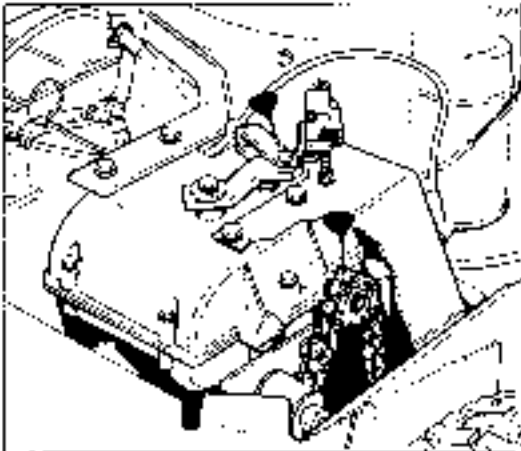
Lubricole Gear Shift Linkage and Chain (Gear Model Shown)
